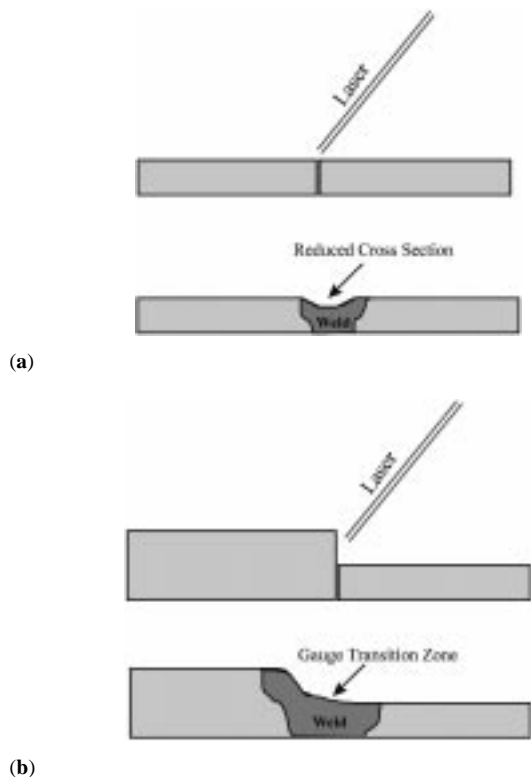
Schematic of the welding of twbs of (a) same gauge and (b) different gauge blanks
